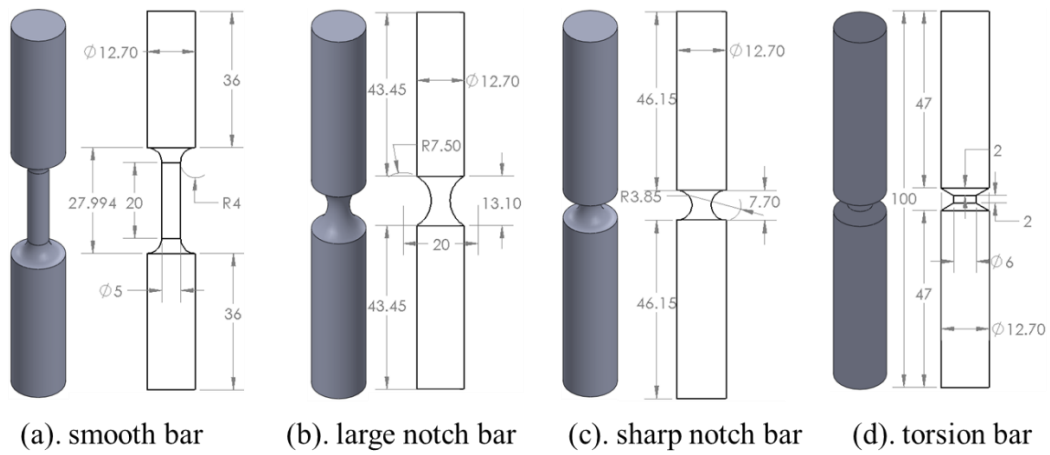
CAD drawings and dimensions of tensile and torsional specimens.
